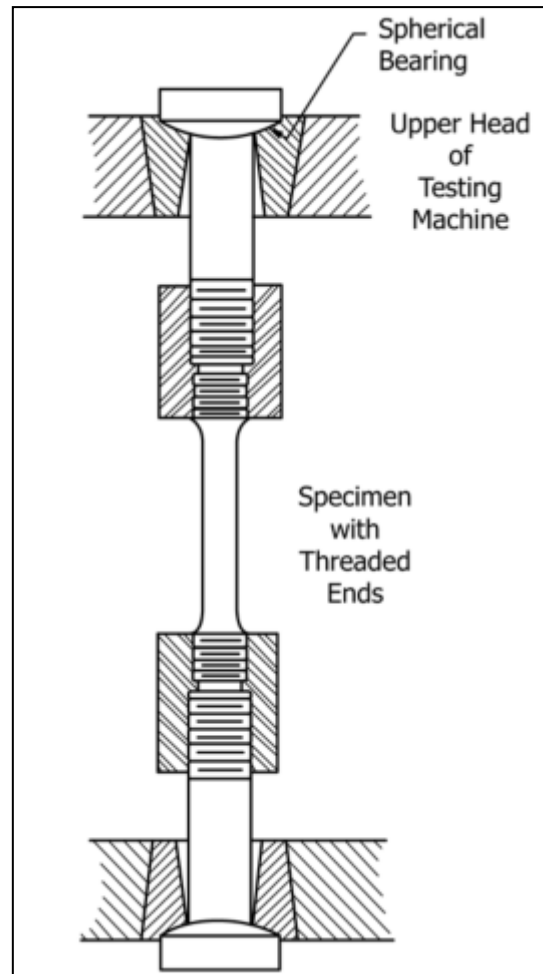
Gripping apparatus for threaded-end specimens concerning to ASTM E8: 2016 standard.
